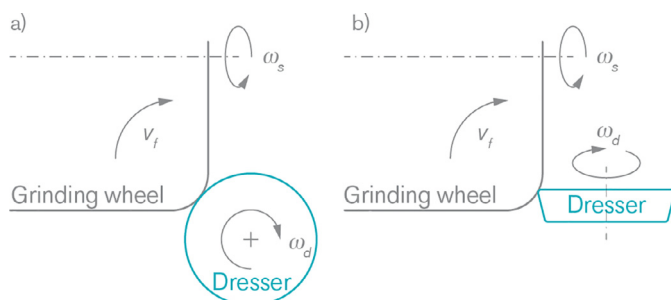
Distinct dressing-system layouts in crankshaft grinders.
